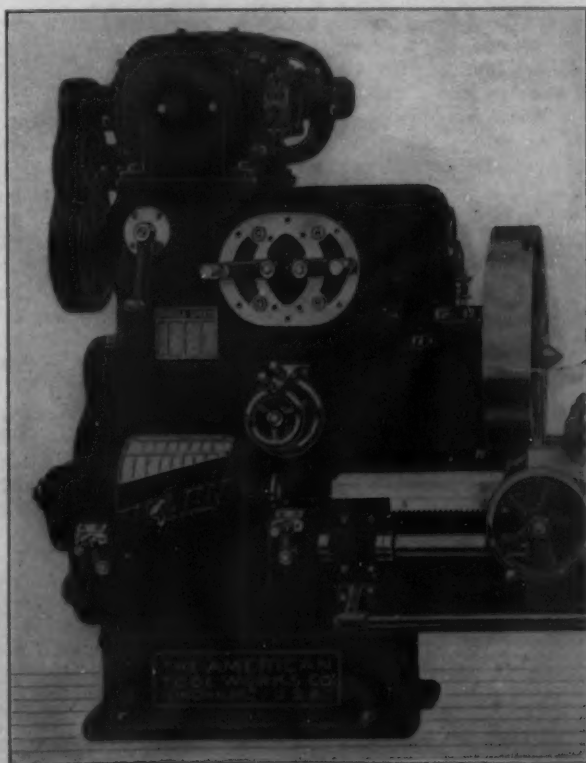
The 12-Speed Head Lathe with Motor Drive.
